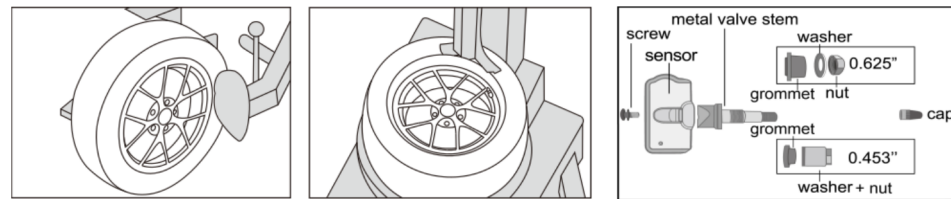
& (Fig 2) Deflate and remove the tire from the wheel using a tire mounting machine.
